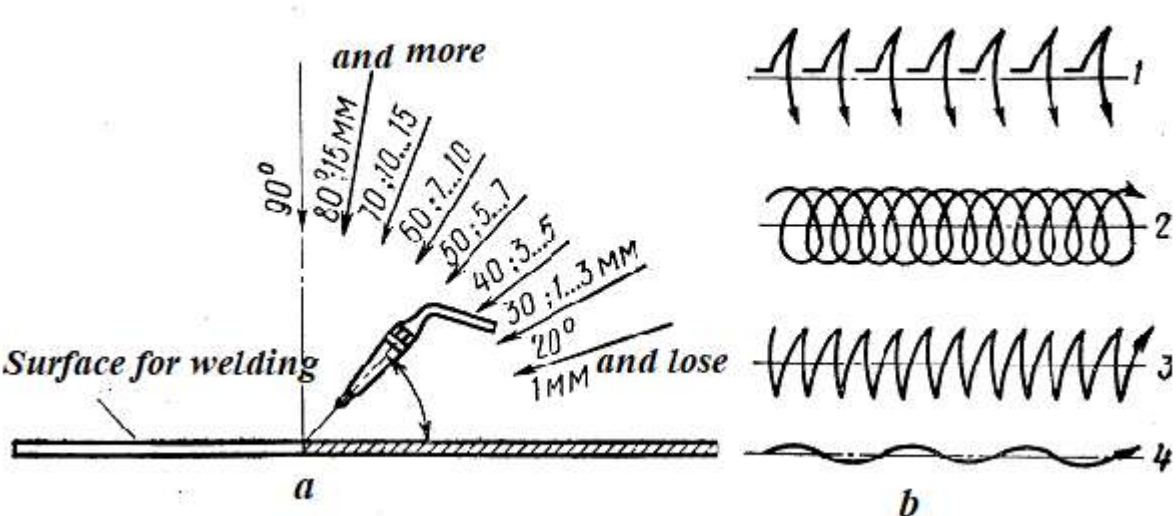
Angles of inclination of the torch nozzle when welding different thicknesses (a) and methods of moving the torch nozzle (b):
